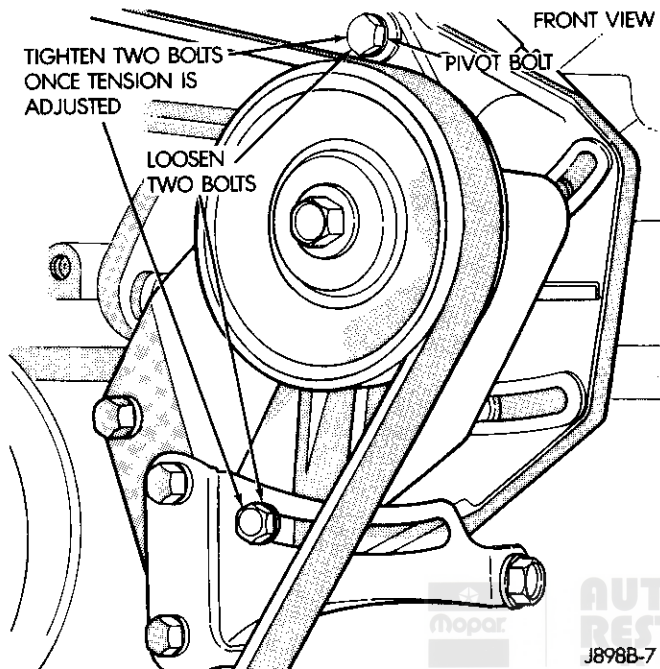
Serpentine Belt Removal/Installation - 2.5L (Front View)
